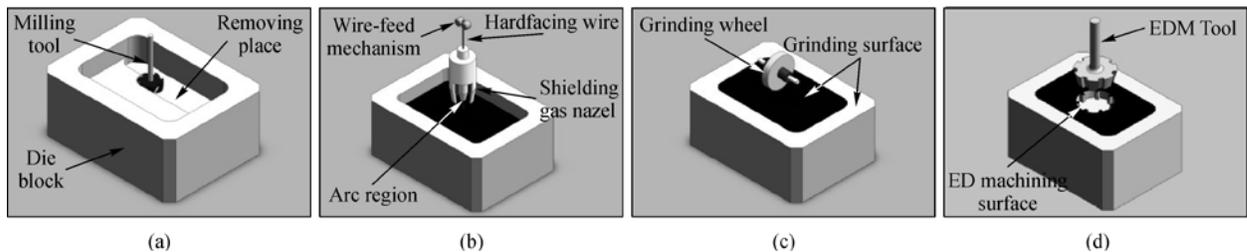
Schematic diagram of production route of molds made of weld metal. (a) Mill-removing of the insert's place; (b) MIG-welding of the insertplace; (c) grinding of the mold face; (d) ED machining of the mold.
